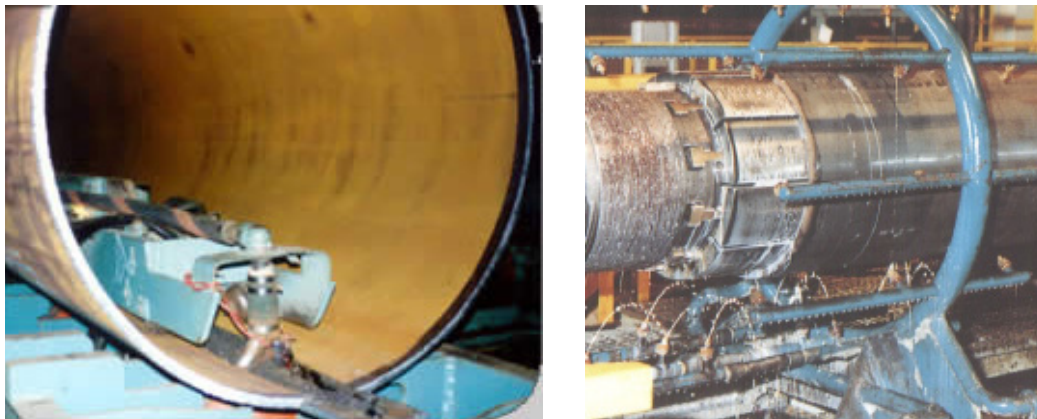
a) SAW Longitudinal Welding
